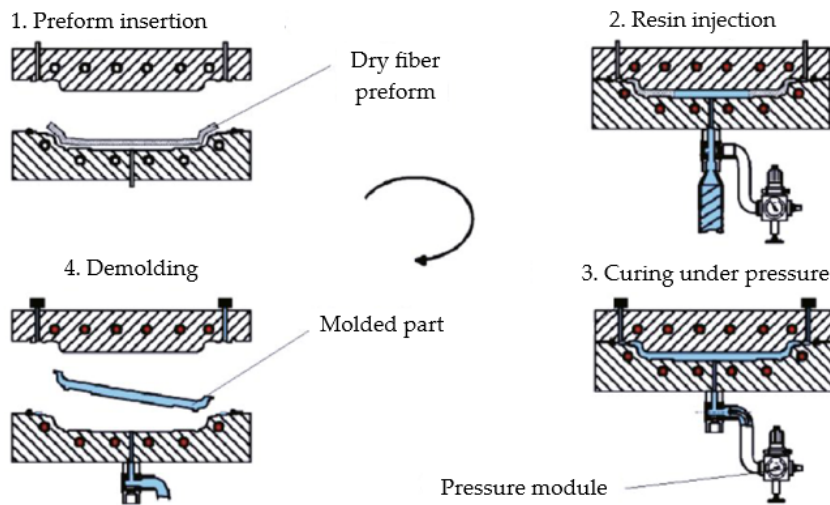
Generalized drawing of the resin injection step of RTM [13].
